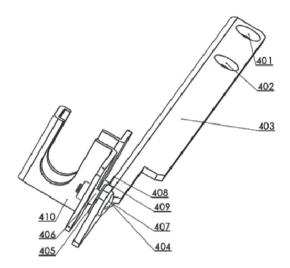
The structure of travel mechanism. 401: fixing hole; 402: fixing hole; 403: connection plate; 404: bolt; 405: spacer; 406: sliding sleeve; 407: connection piece.
